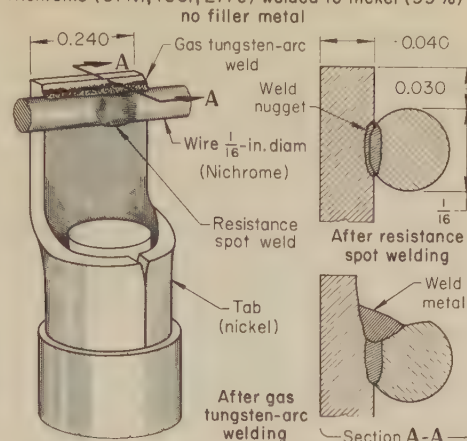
Electrical connection that was gas tungsten-arc welded for high reliability (Example 353)
